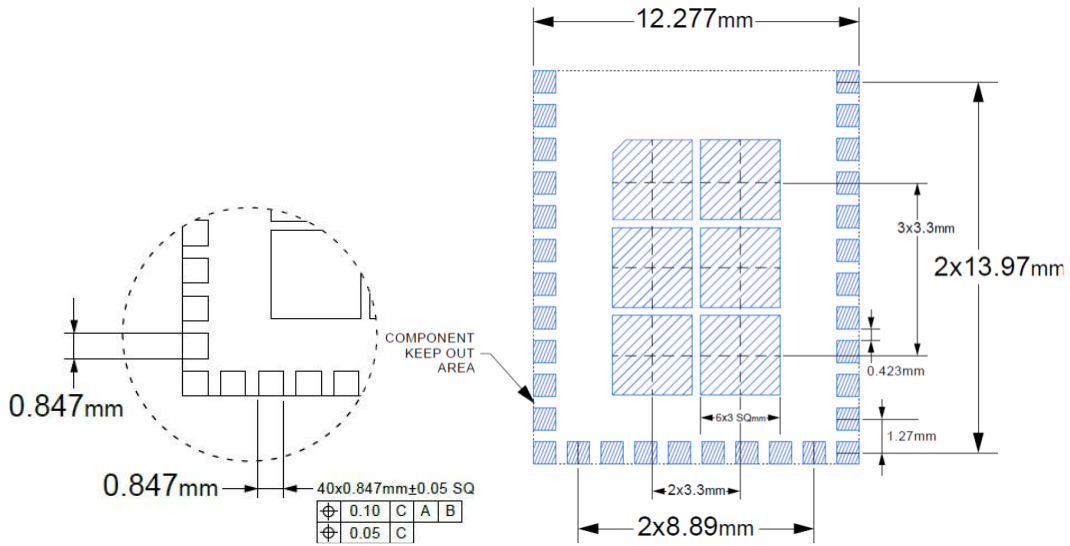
MQM730i-1P/1U Module PCB Landing Pattern
